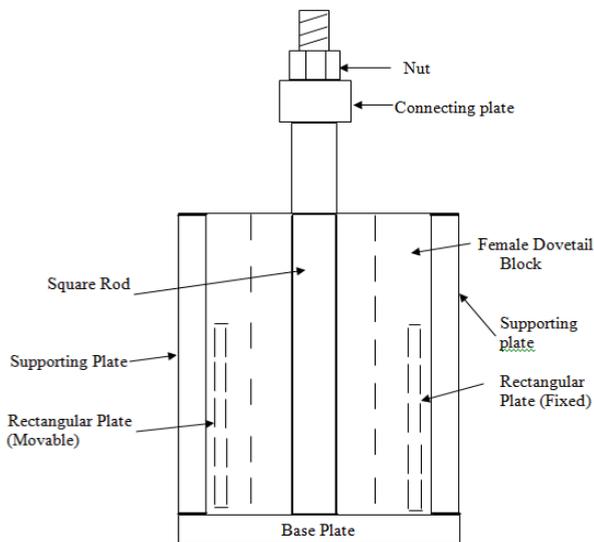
Front view (operator side) of slotting and milling attachment to lathe
